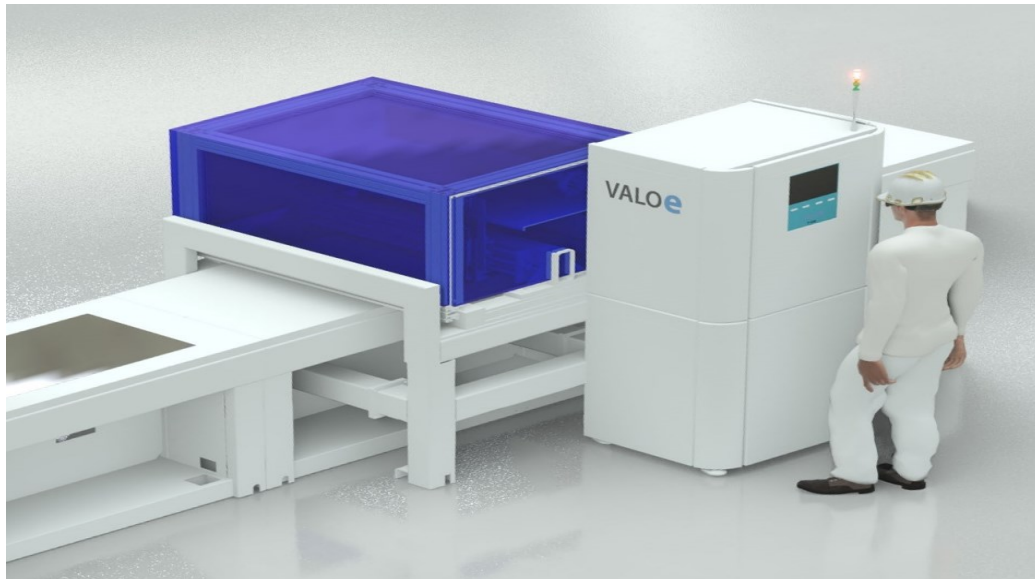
Wire Welding Unit (Valoe, 2022).
